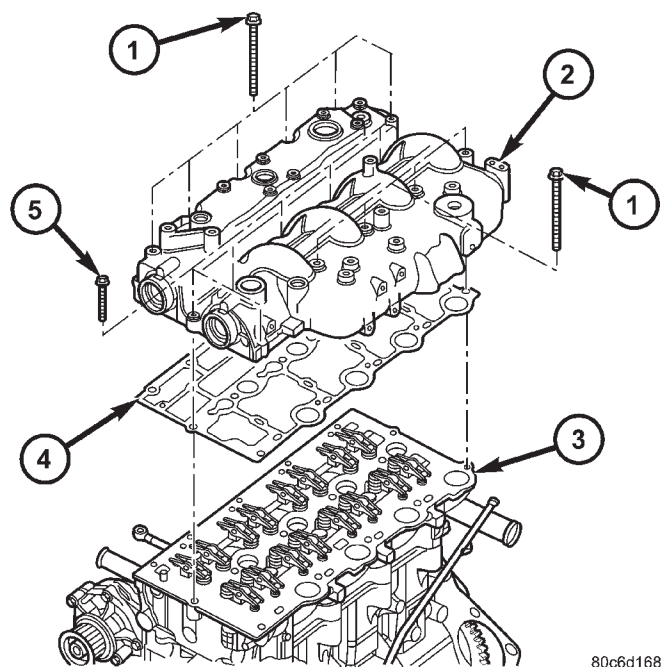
CYLINDER HEAD COVER/INTAKE MANIFOLD ASSEMBLY
